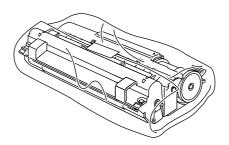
Placing the Drum Unit in the Plastic Bag
